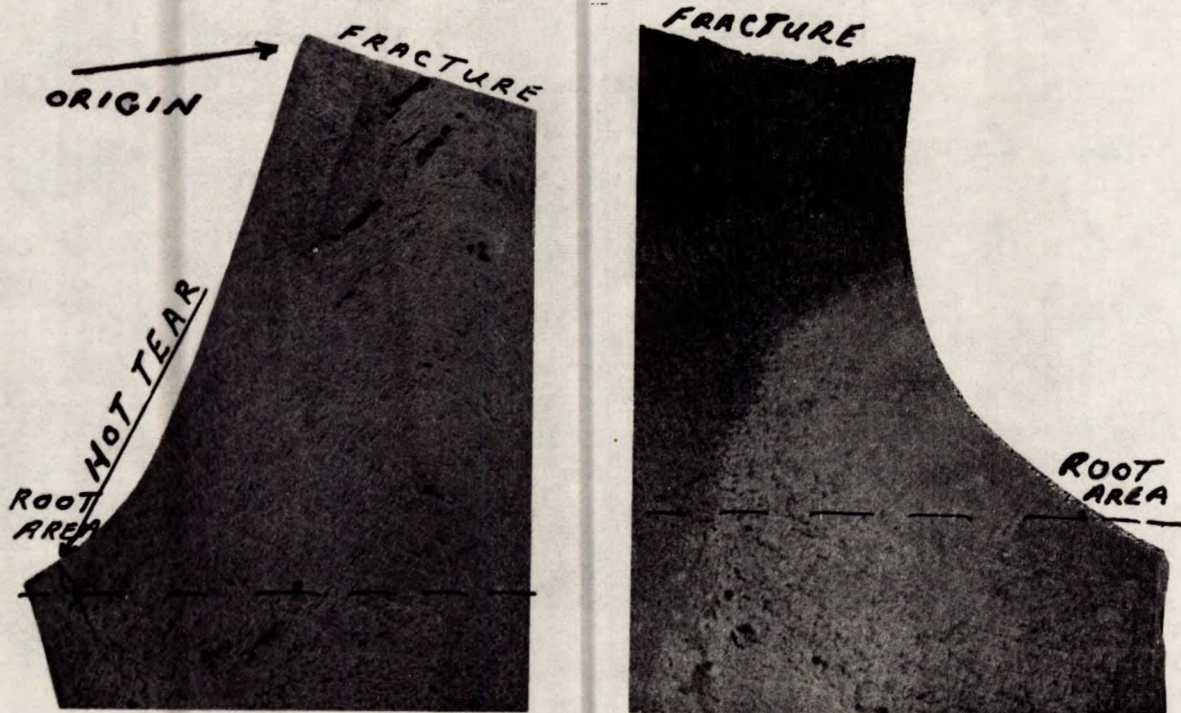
Sulphur Print of Section Directly Beneath Fracture Surface.
